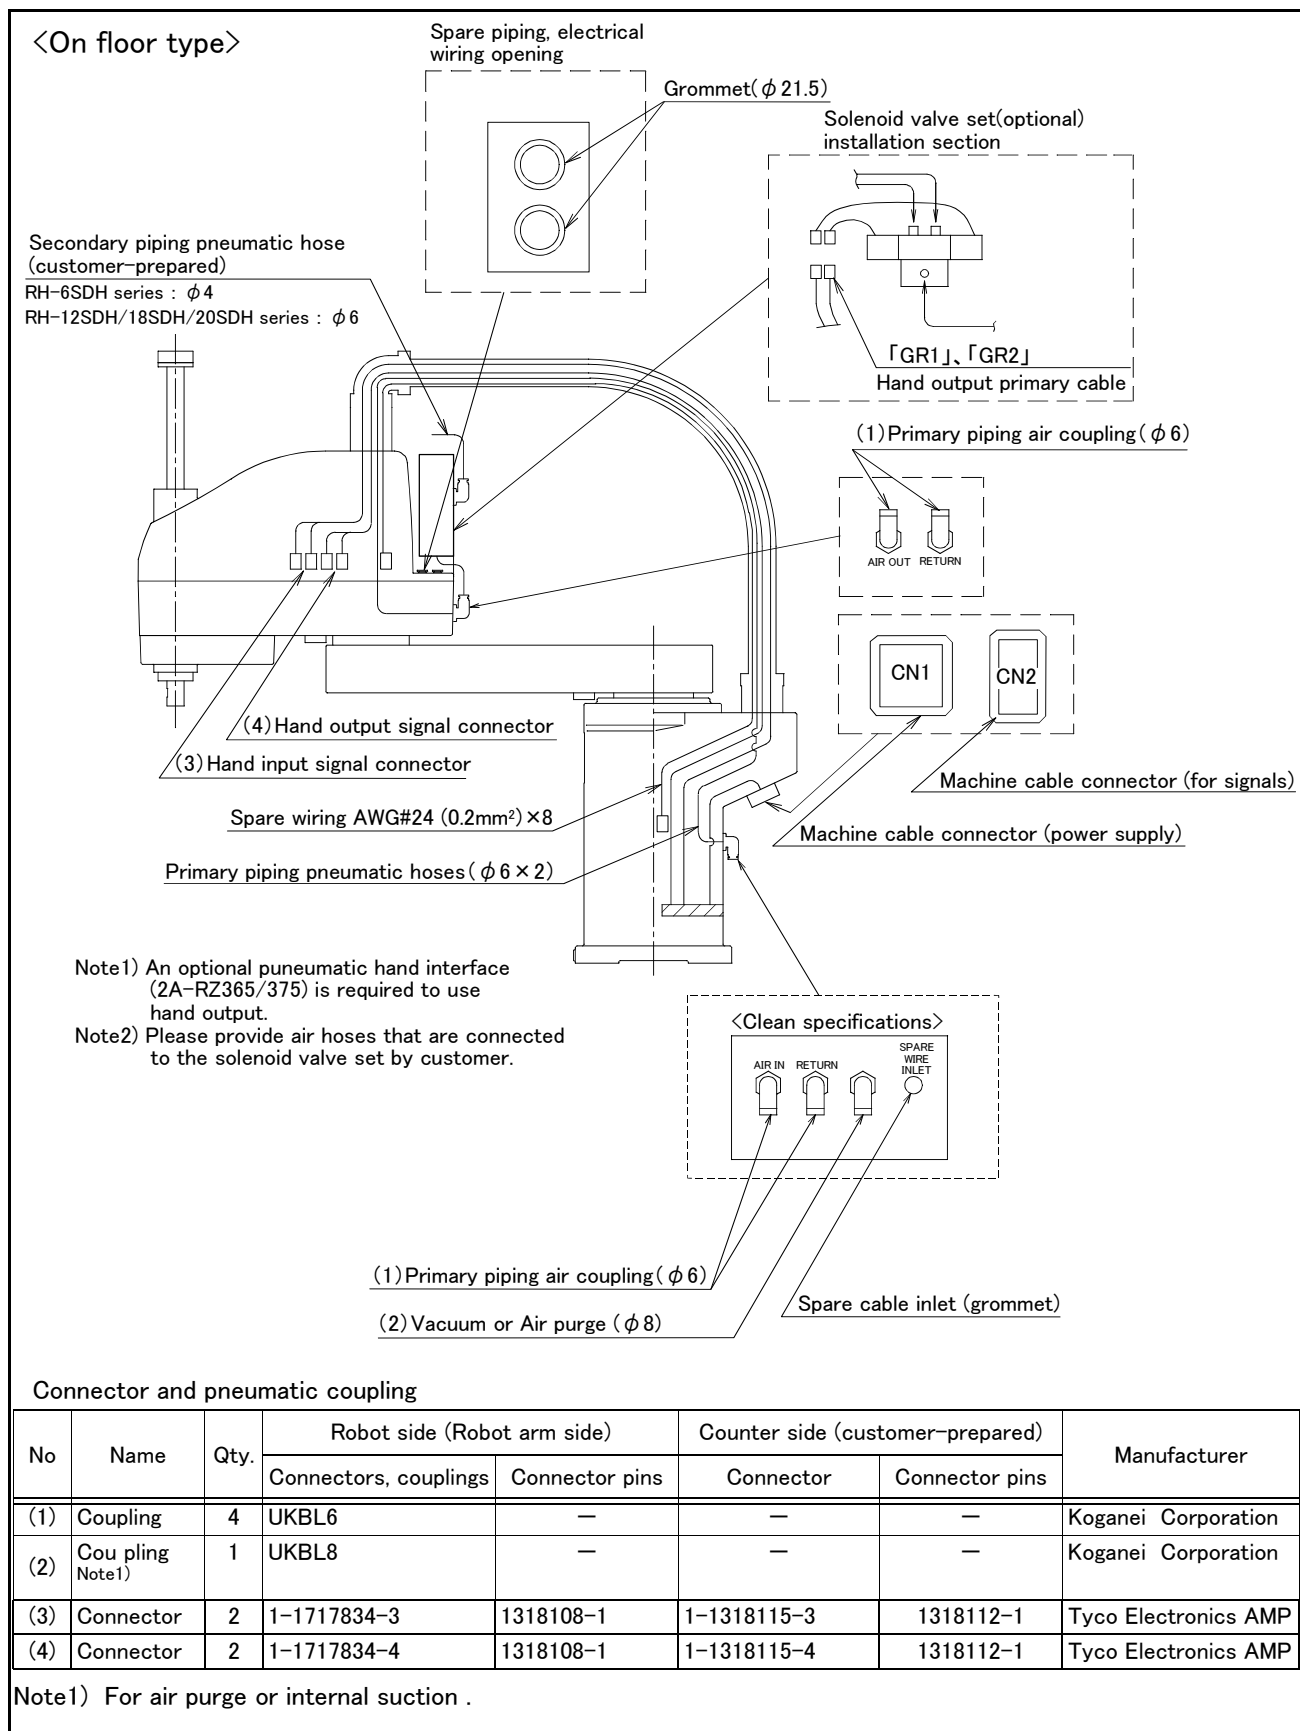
Wiring and piping for hand (Floor installation type)
